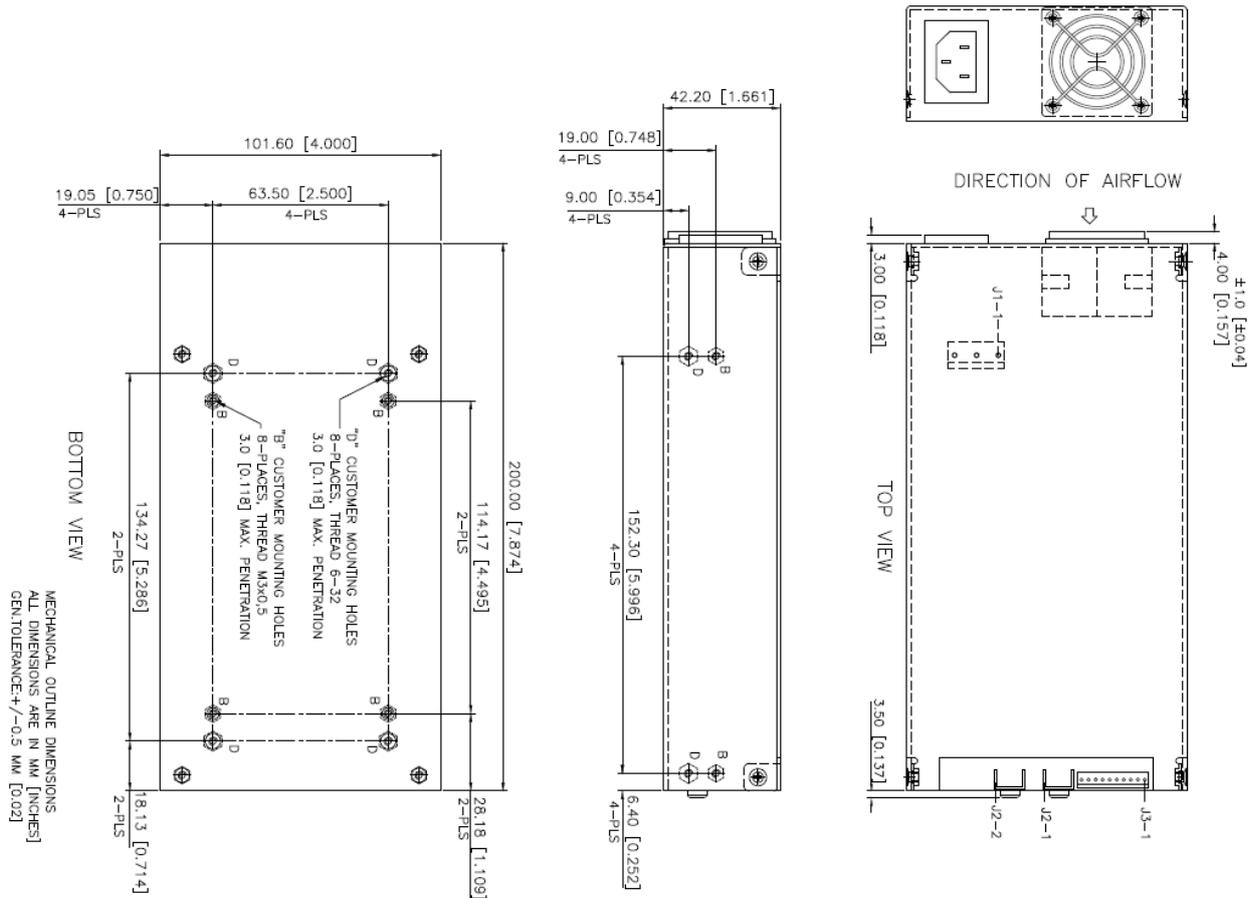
Dimensions Drawing (With Side Fan Mounting)
